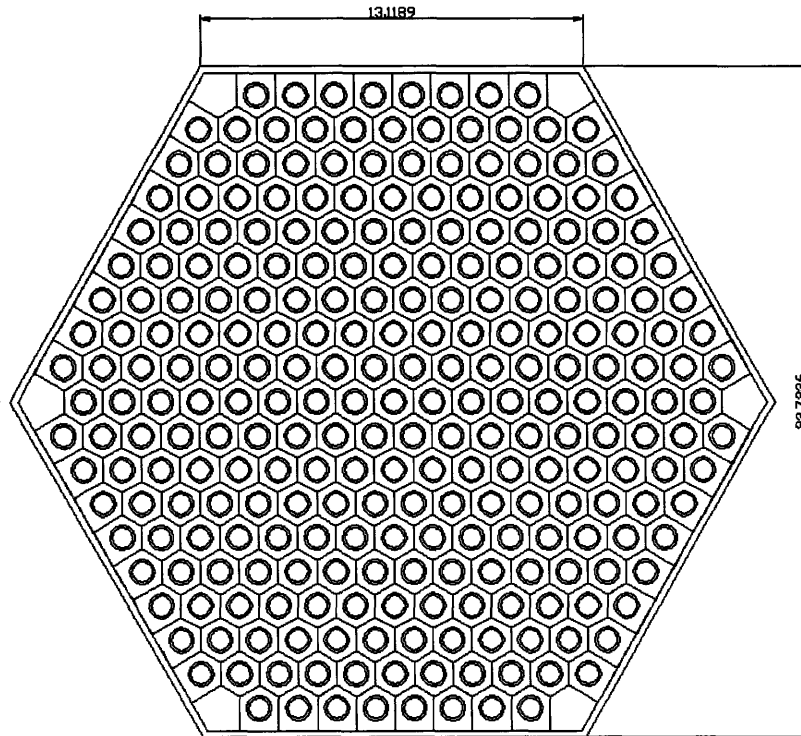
Horizontal cross-section of TID fuel assembly with hot dimensions in cm.
